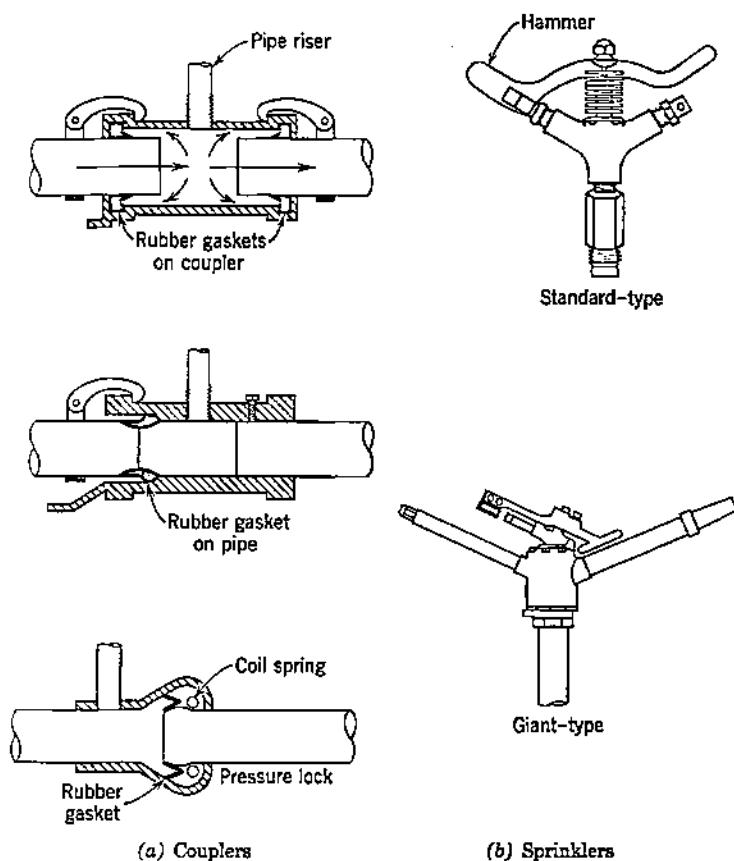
Quick-connecting couplers and sprinkler heads.
